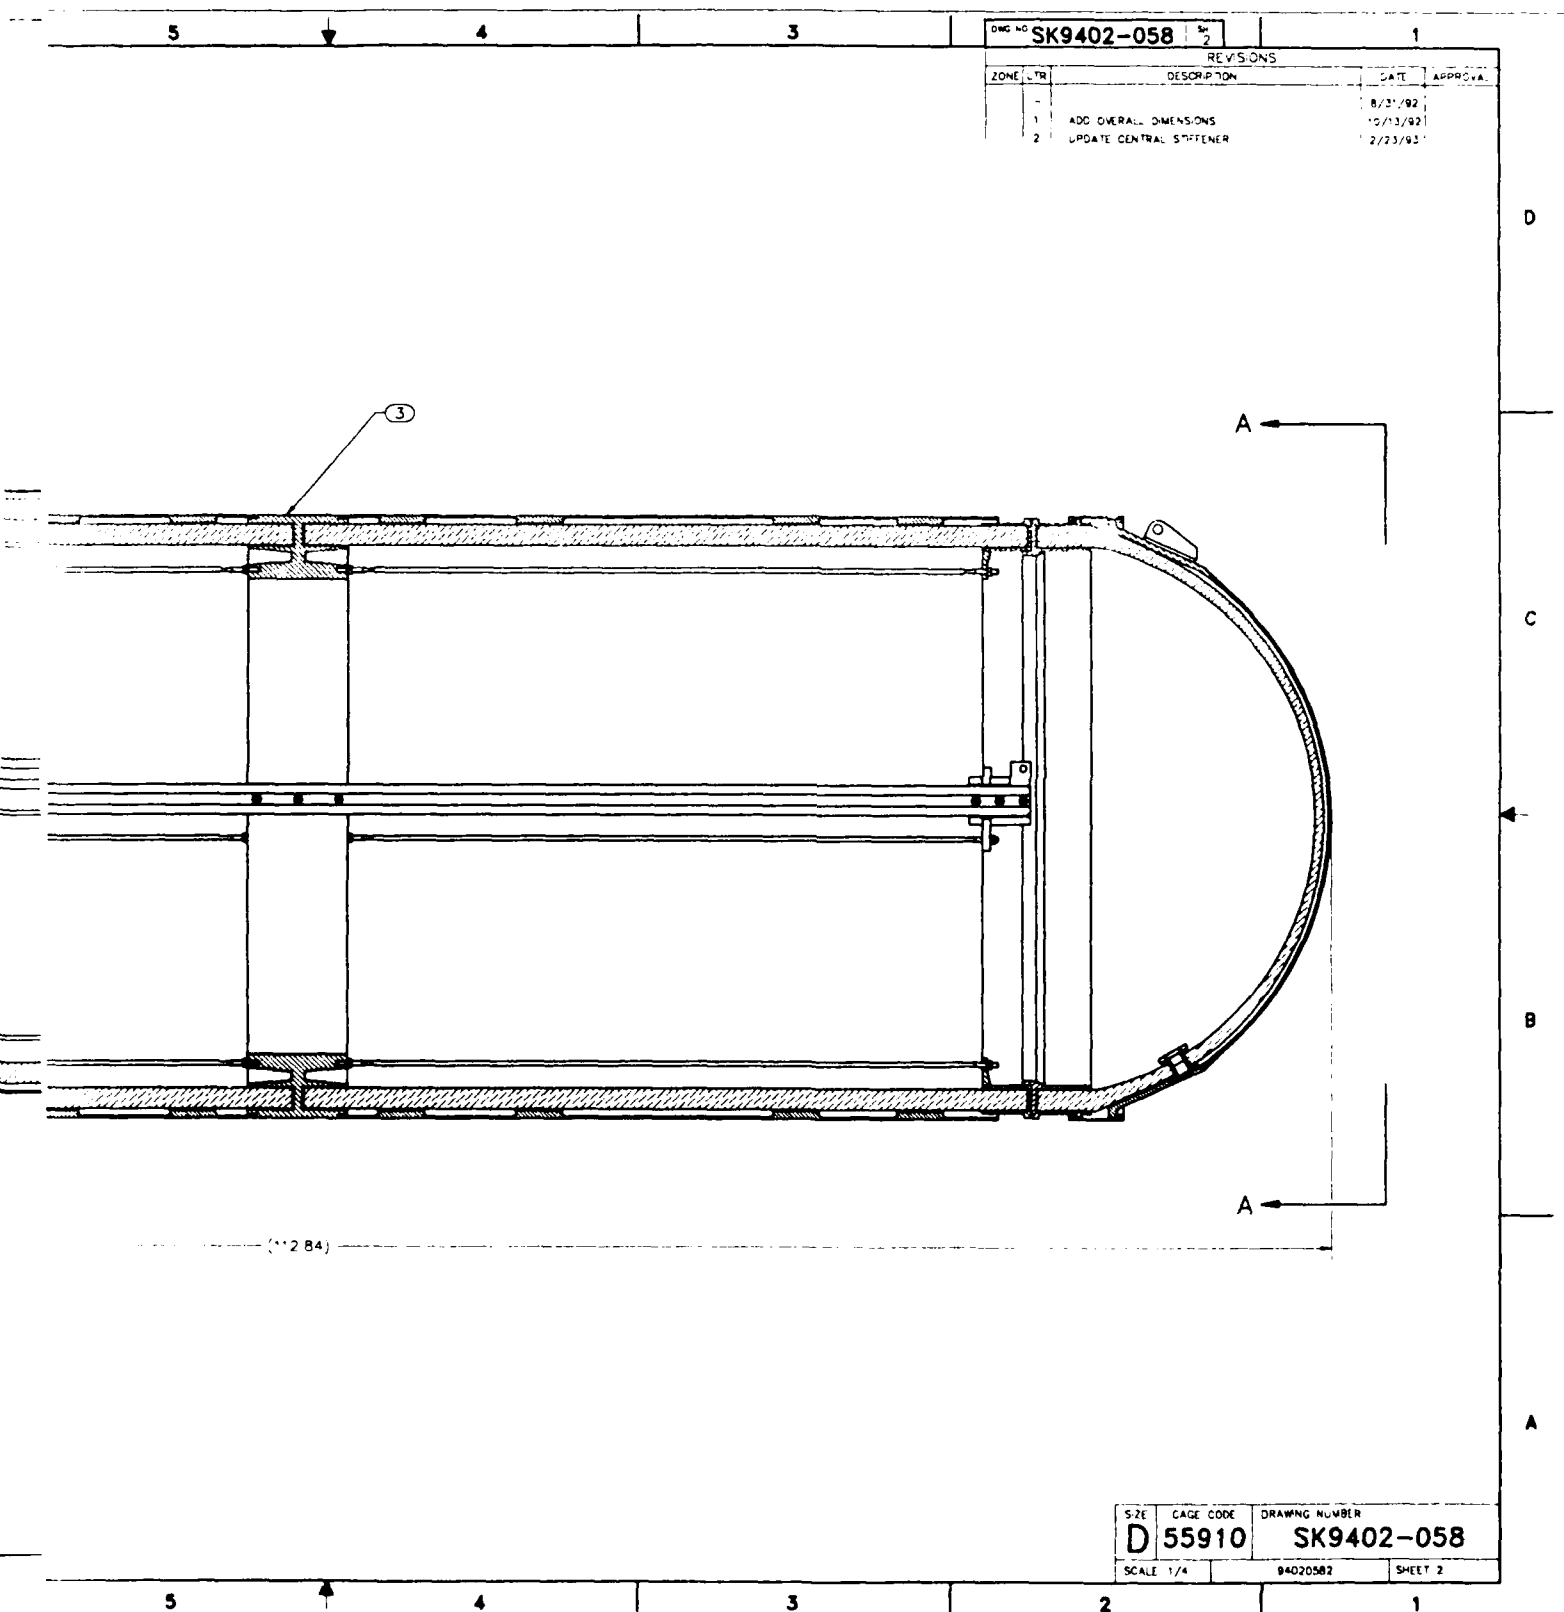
33-inch housing assembly drawing, Sheet 2.
